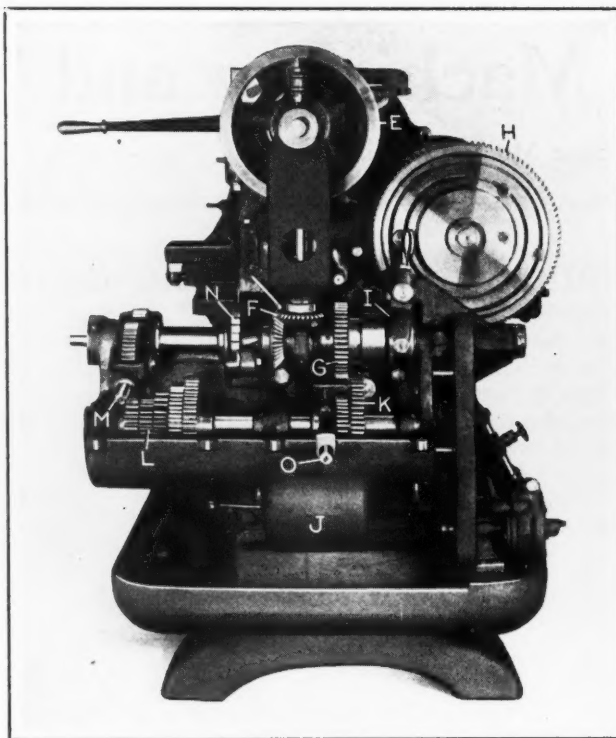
Right-hand End of Cleveland Automatic, with Guards removed to show the Various Gears
